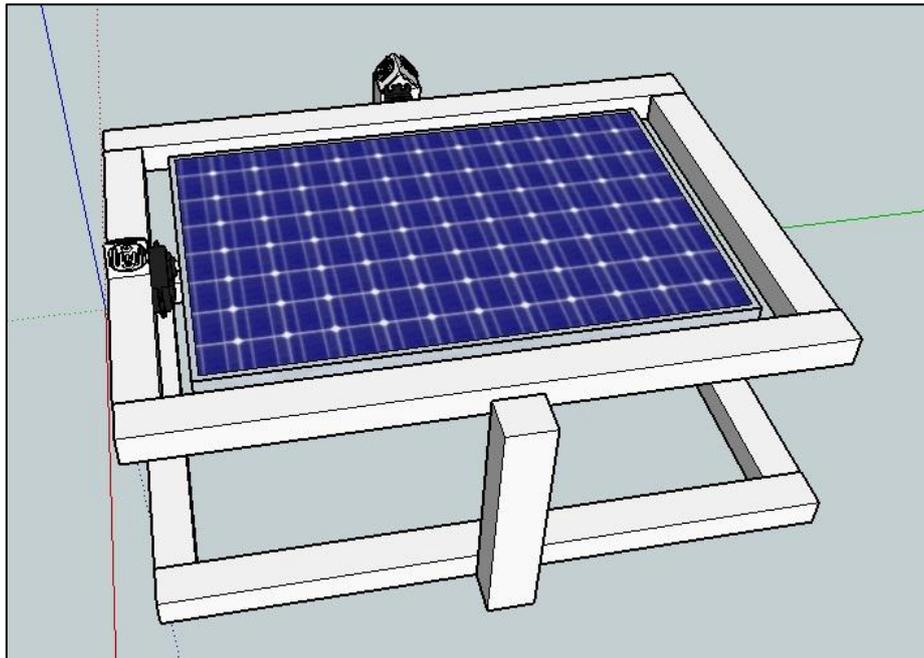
Dual Axis Solar Panel 3D drawing from left side
